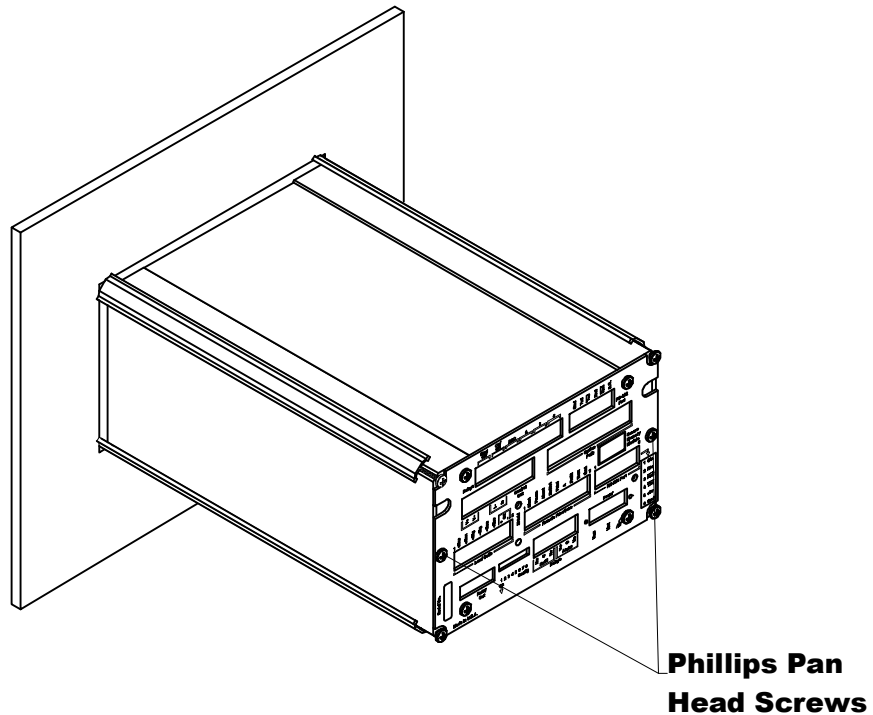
HI 2160RC^{PLUS} BACK PANEL
